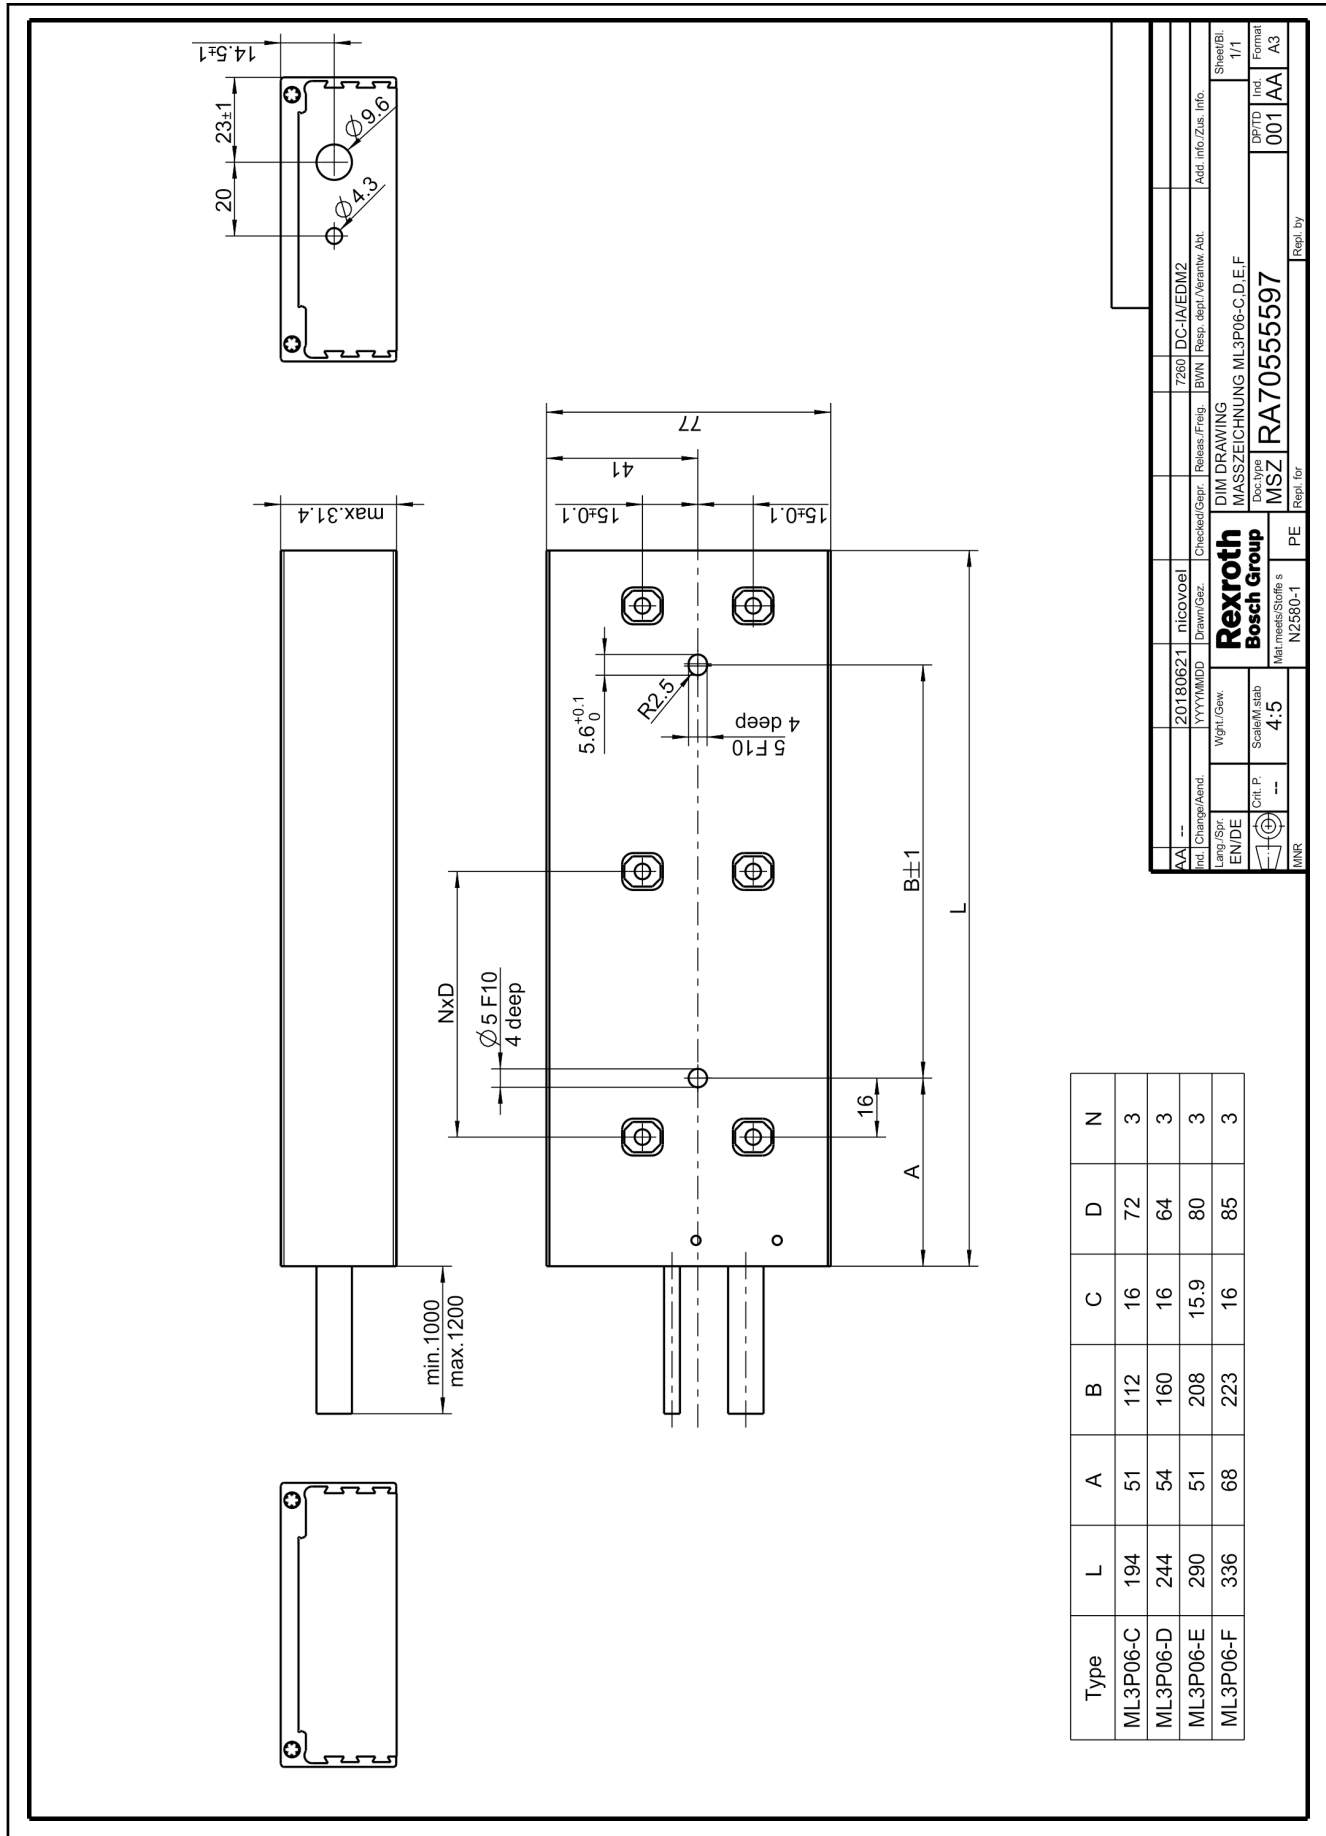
Dimension sheet primary part ML3P06-C/D/E/F
